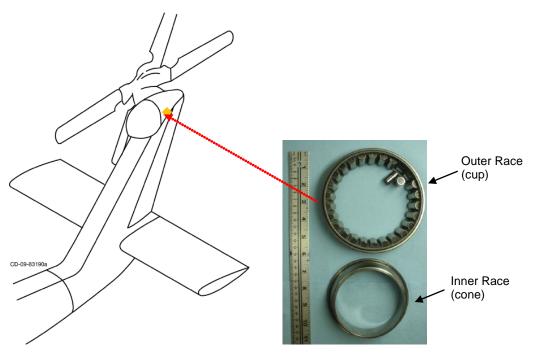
Location of accelerometers to monitor TGB output shaft thrust bearing.
